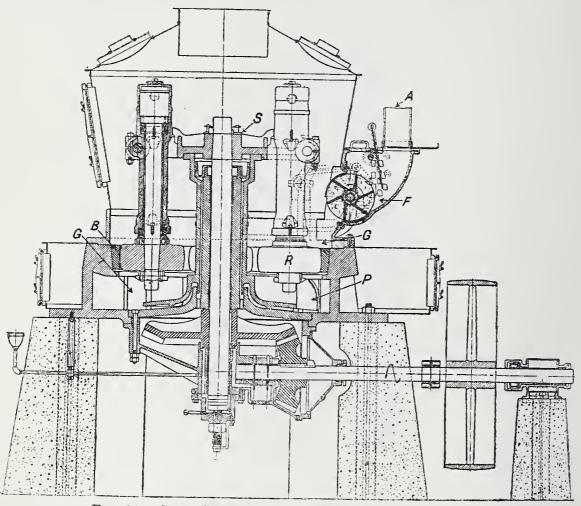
Cross-Section of Raymond Four-Roller Mill
